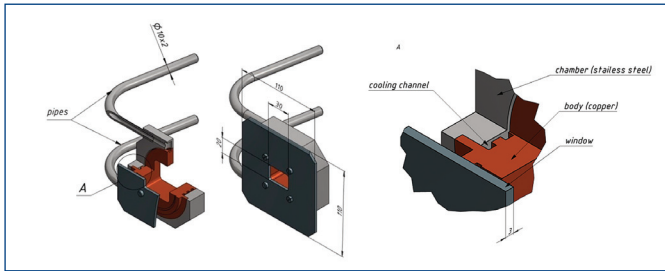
Schematic diagram of the safety part (dimensions in millimetres)
